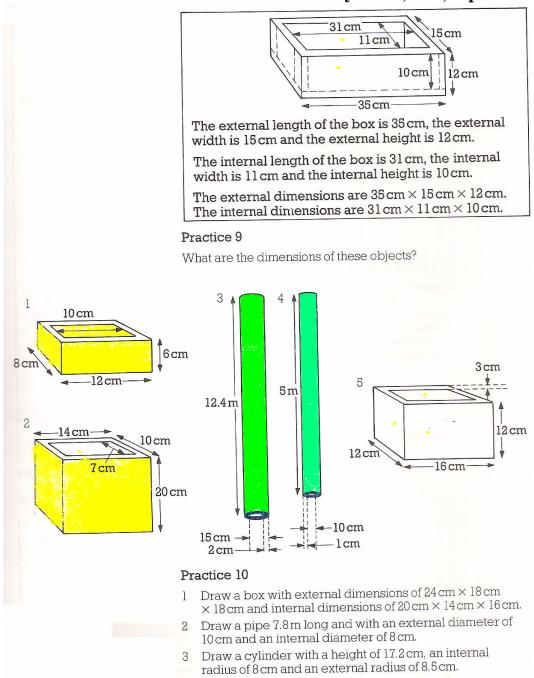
External and internal dimensions of cylinder, box, pipe
